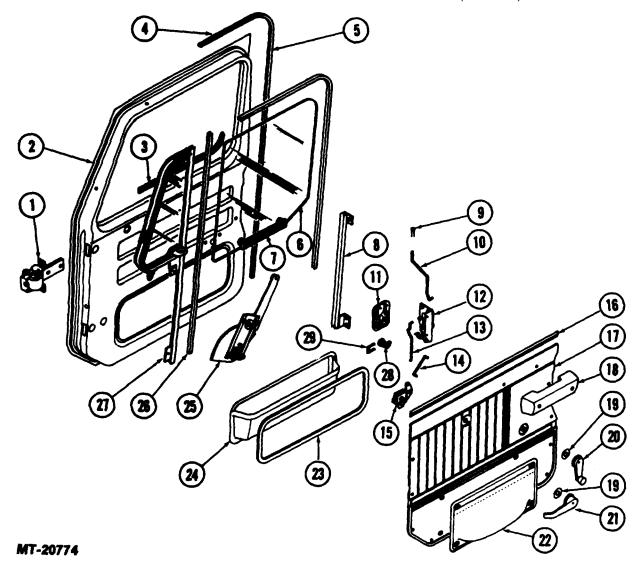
Door Hardware, Trim and Internal Components - Exploded View
